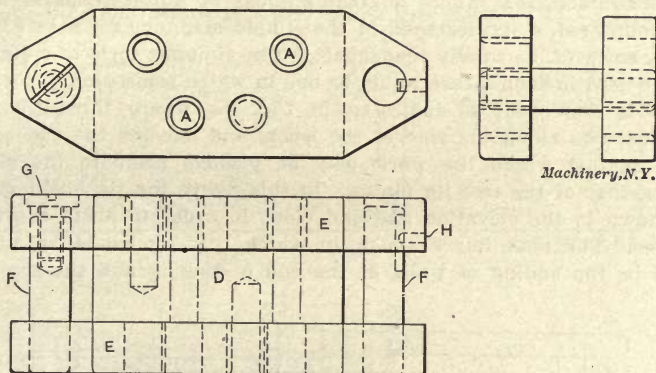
Simplest Form of Closed Jig for Drilling Work in Fig. 83
